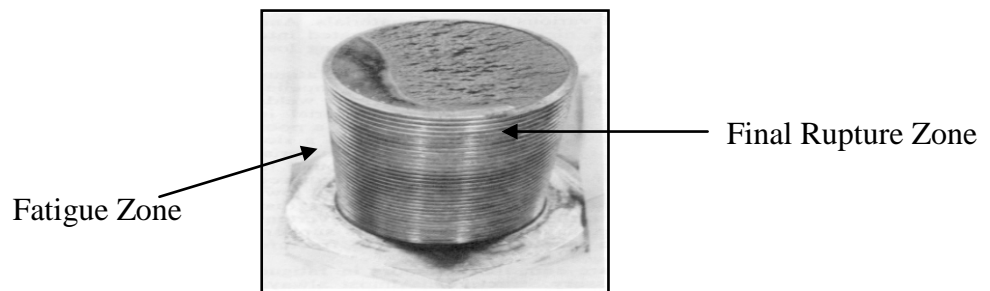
Fatigue Fracture Surface<sup>9</sup>
